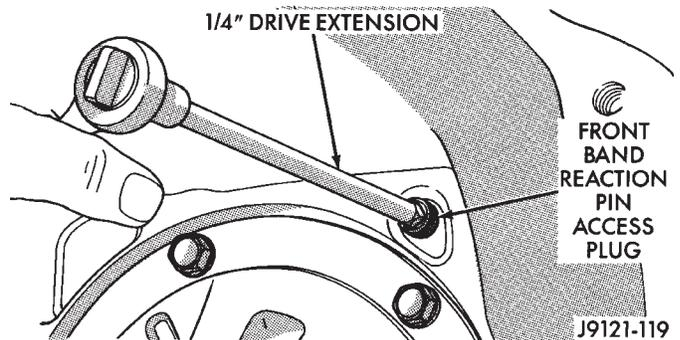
Removing/Installing Front Band Pivot Pin Access Plug
